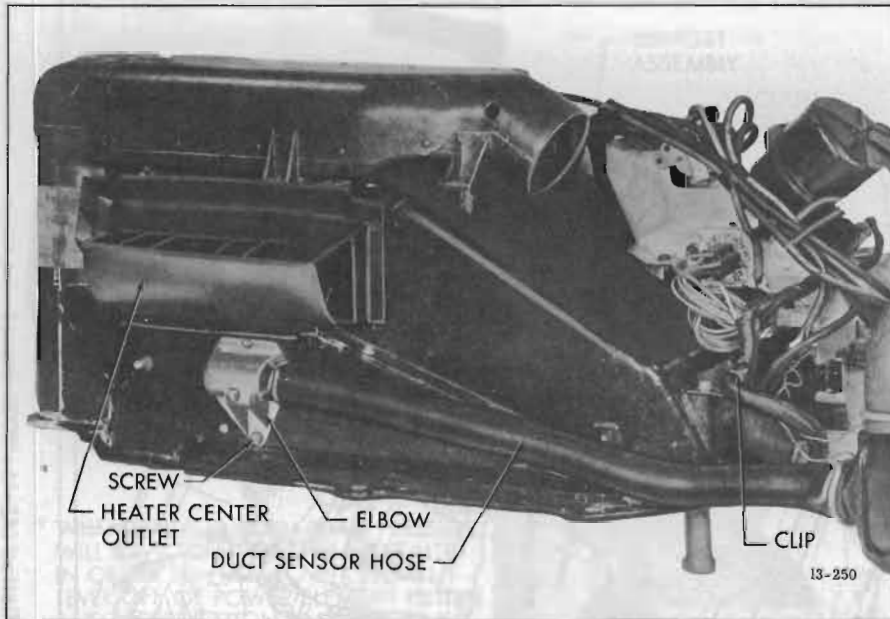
Heater-Air Conditioner Assembly - Bottom View
